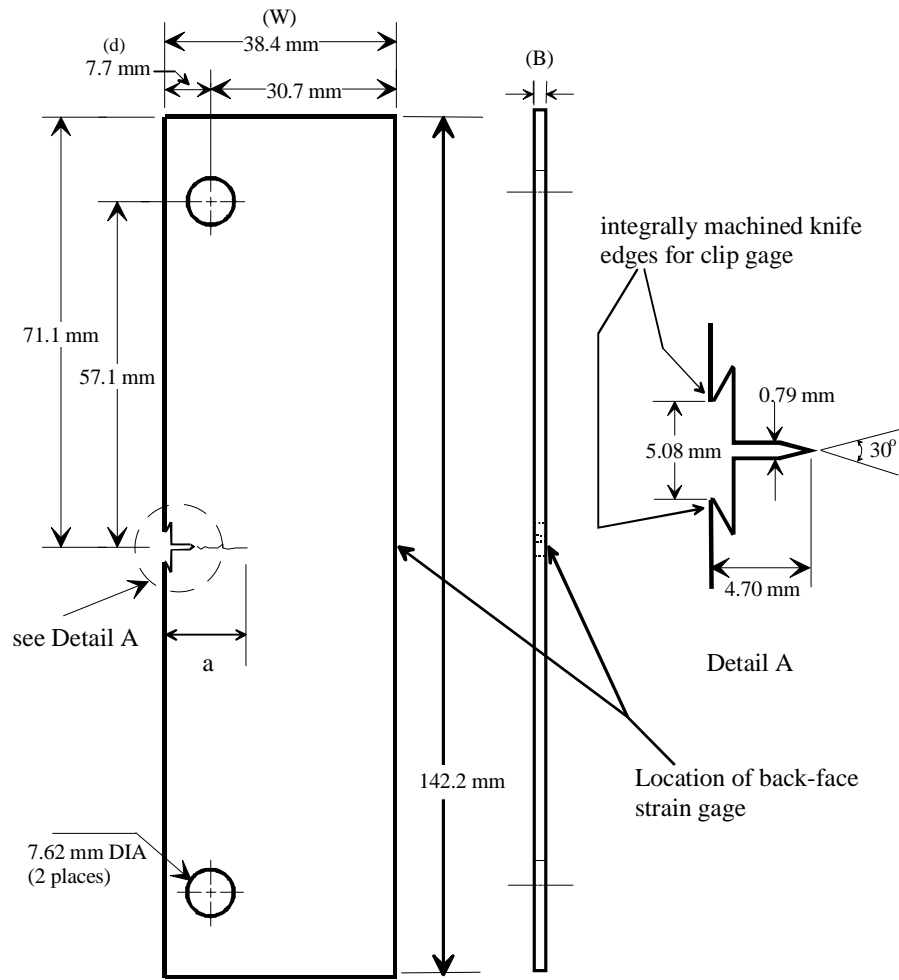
Specimen design for eccentrically-loaded single edge crack tension (ESE(T)) specimen.
